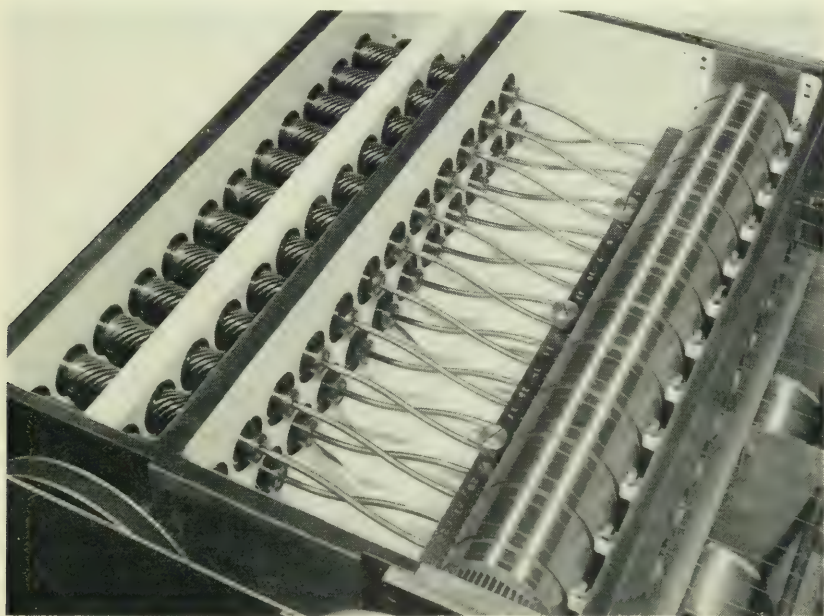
Straightening mechanism of 24 double head wire straightening machine.
